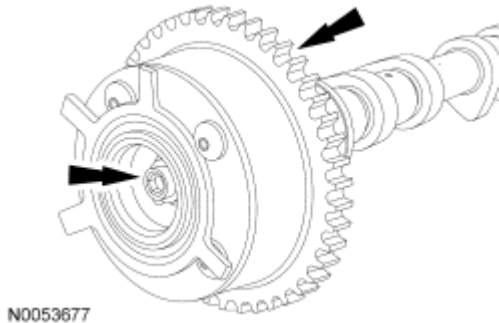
Locating VCT Actuator Onto Intake Camshaft
